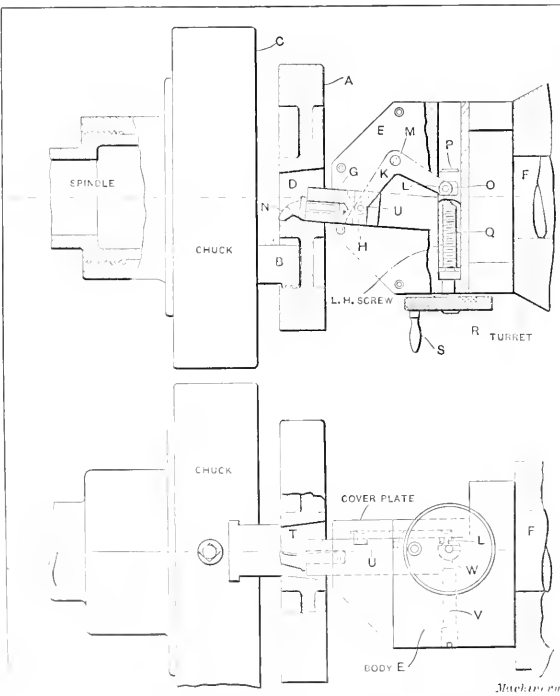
Attachment for generating Small Taper Hole in a Motorcycle Flywheel
